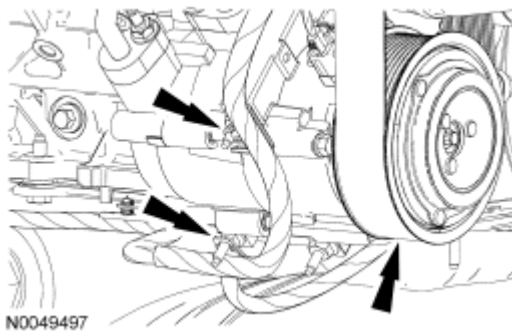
Identifying SC Drive Belt, A/C Compressor, Wiring Harness Retainers & A/C Compressor Stud Bolts
